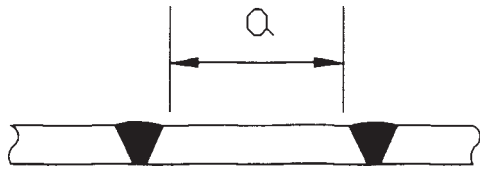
Improper Distance Between Adjacent Butt Welds
